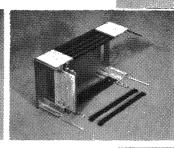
Photo M — Standard 4-card chassis MSI 804 disassembled to show relationship of parts.
